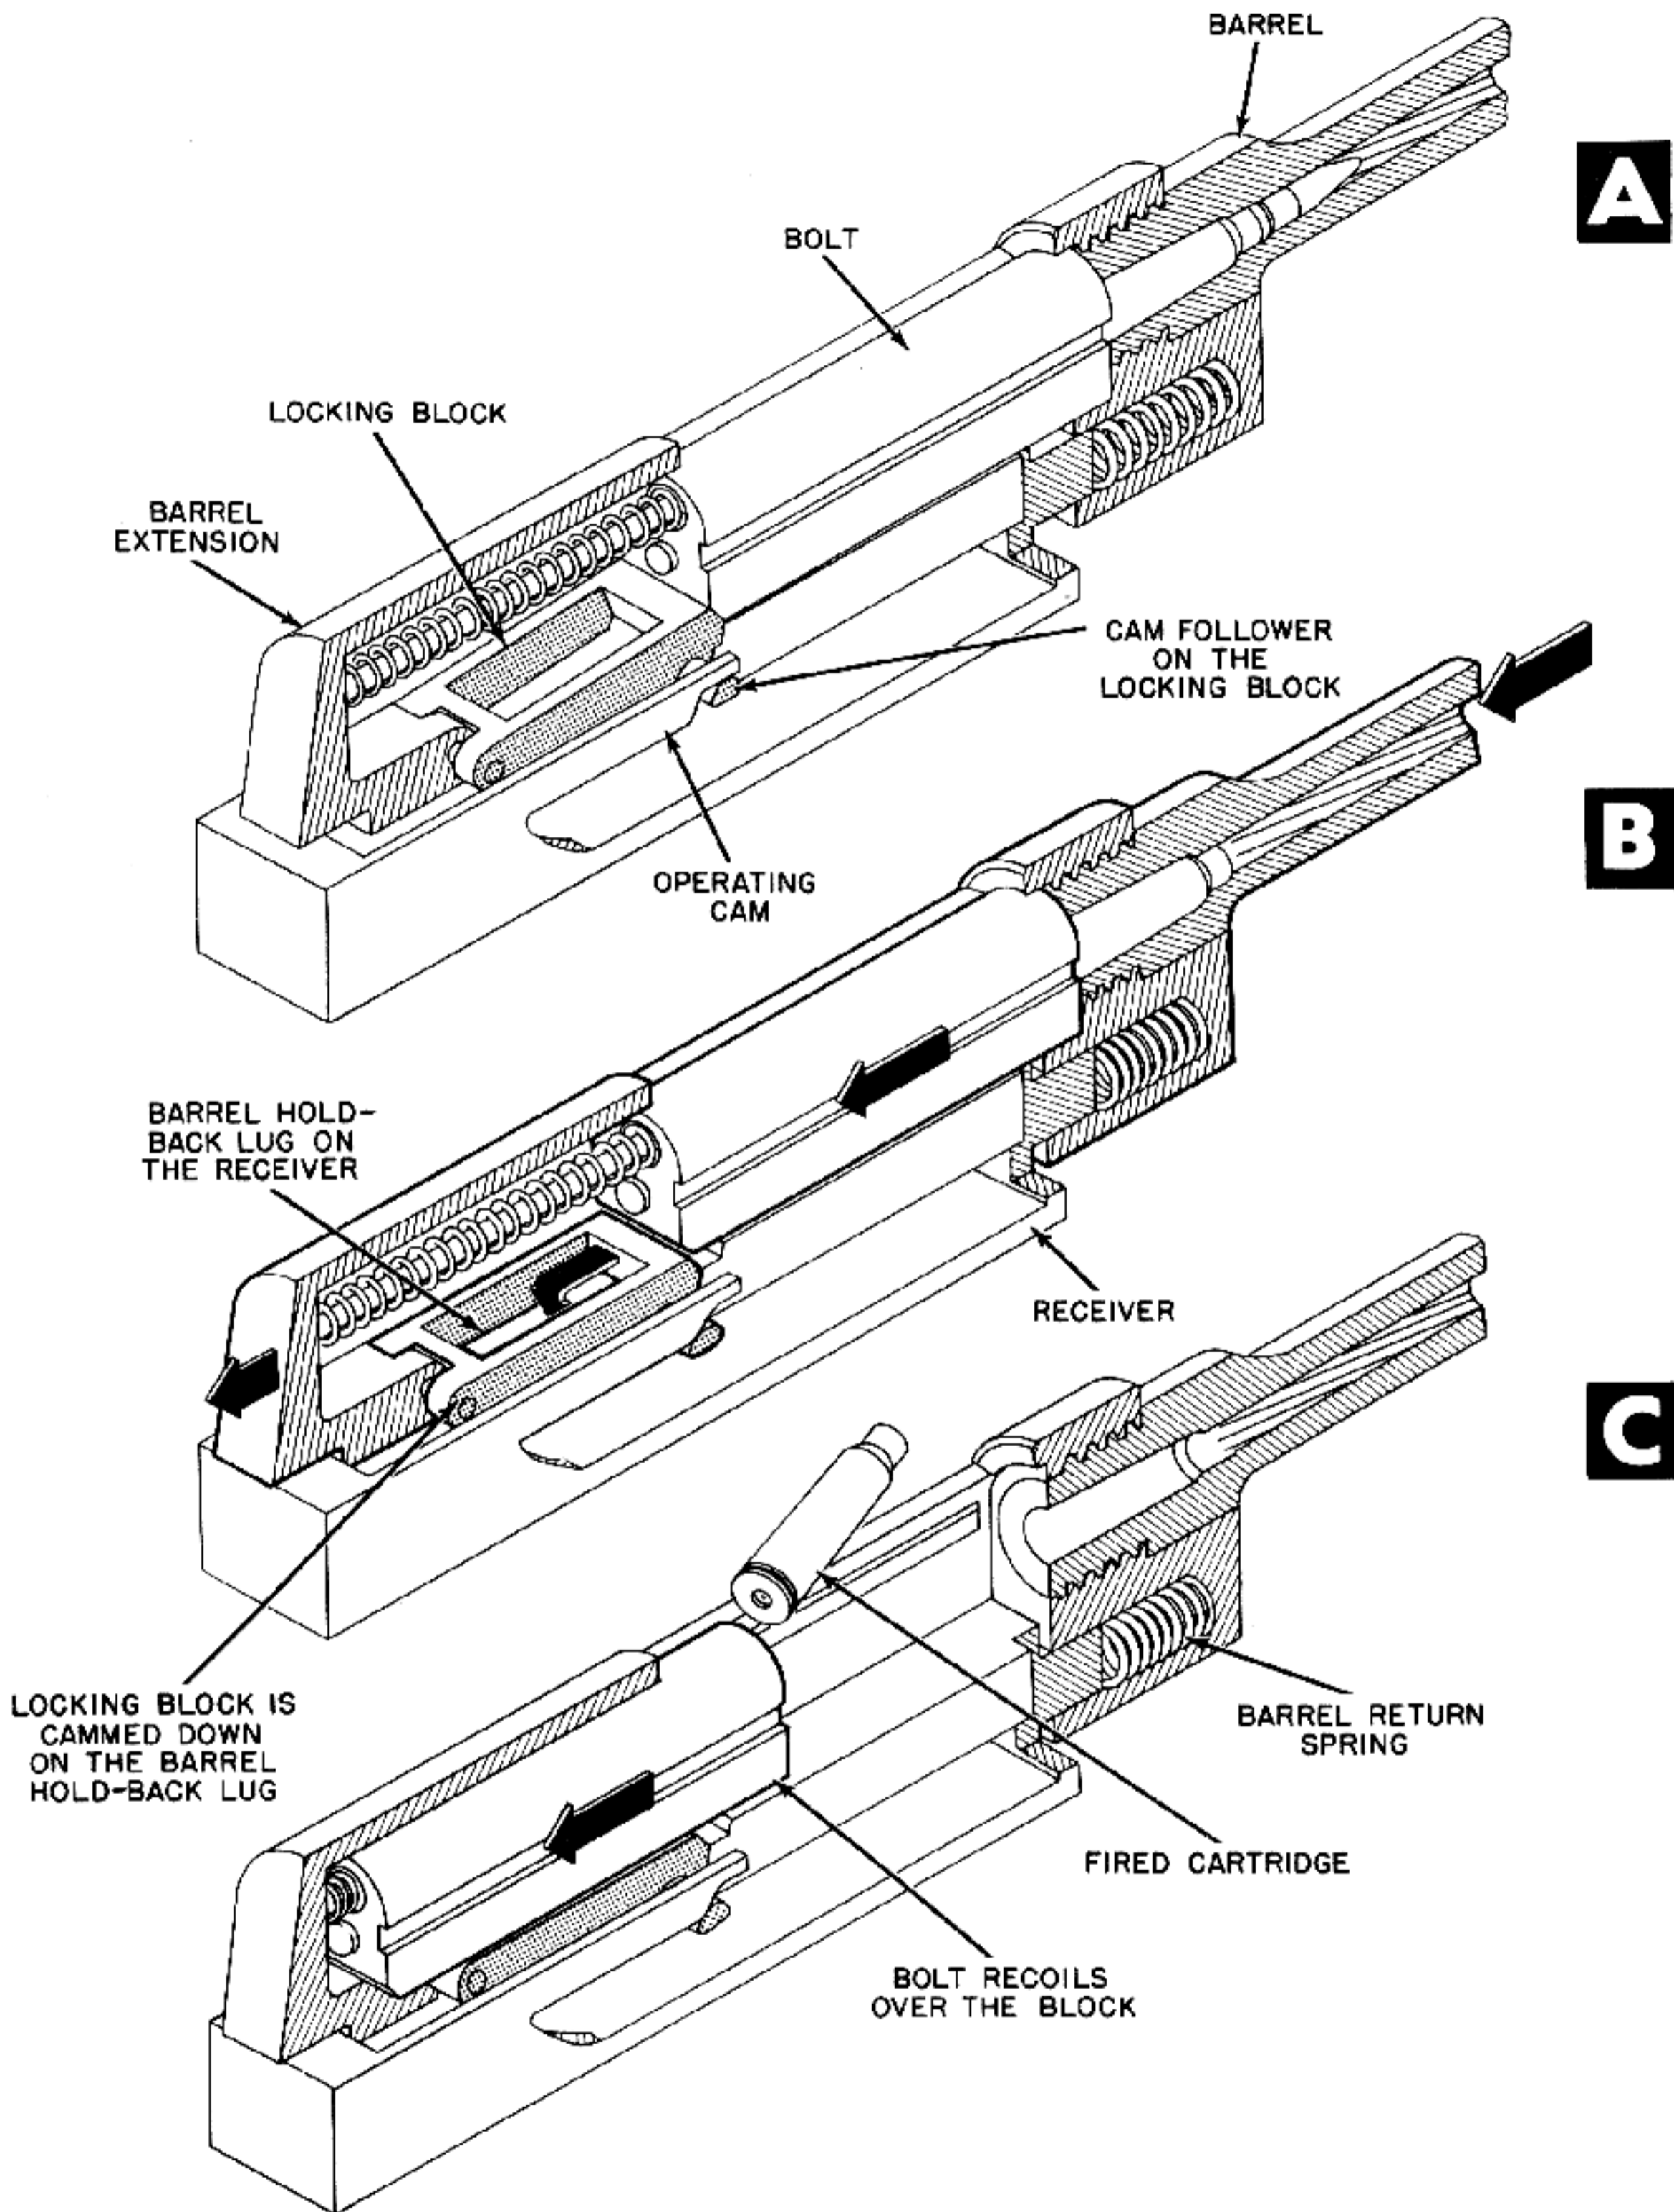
Groove in Receiver Cams Locking Block Free of Bolt.
